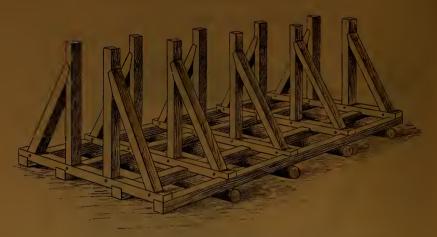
RACK FOR MOVING PLATE GLASS.
